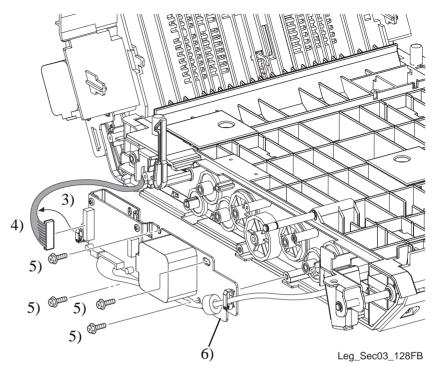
Removal of MOTOR ASSY DUP (1)
